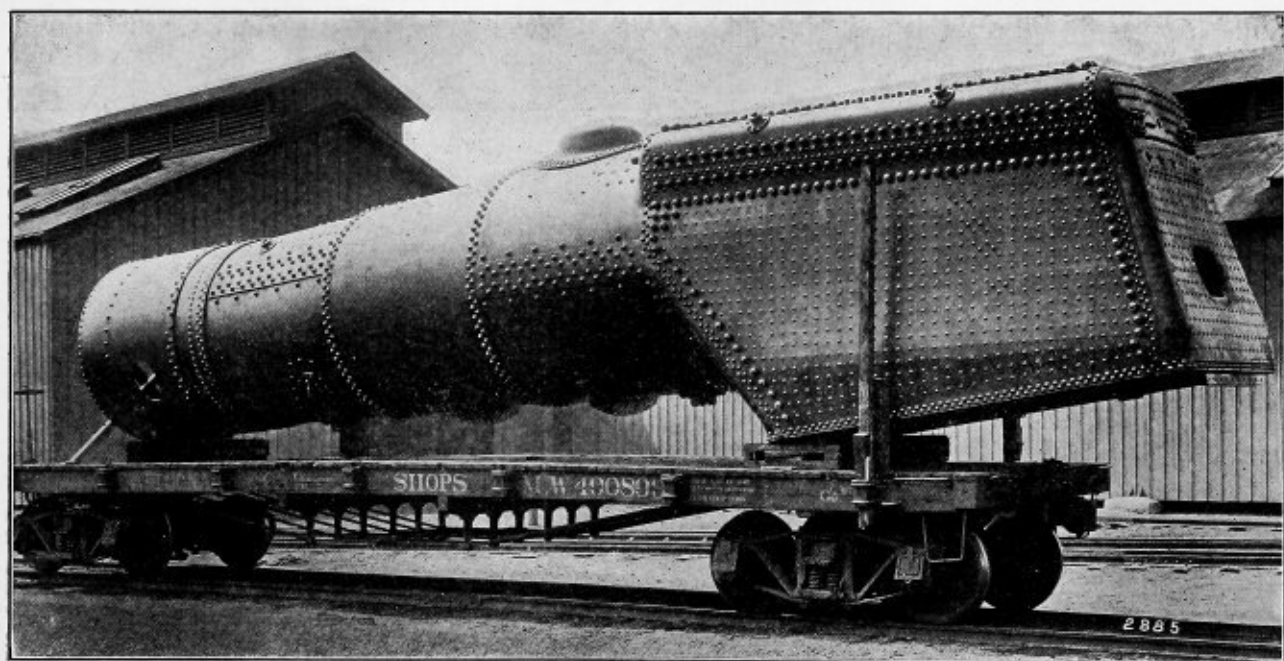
Completed Belpaire Type Boiler for New Pennsylvania Locomotives
